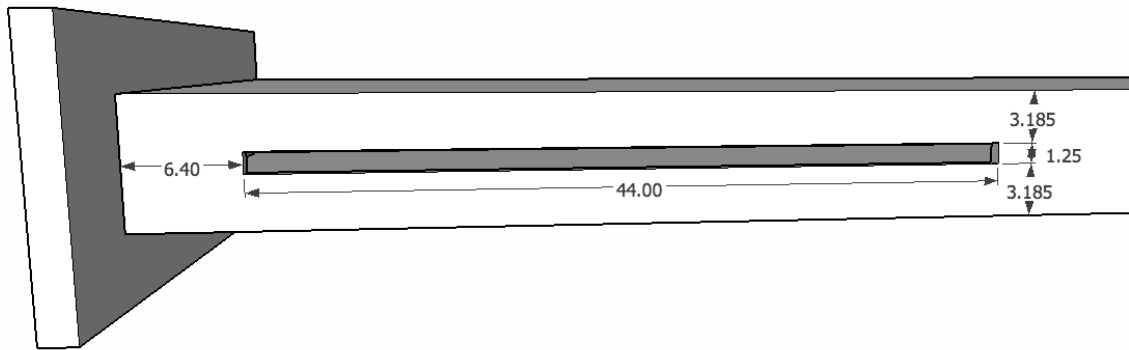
Dimensions and position of the sheet-of-flame window cut. All dimensions are in cm.
